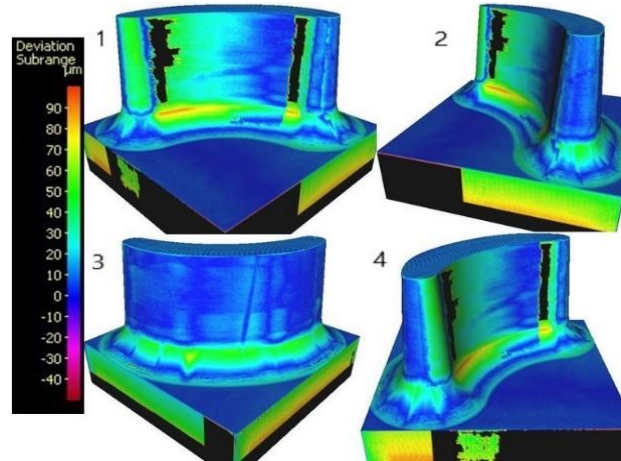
Comparison of the original model with the workpiece after milling (tool path tolerance $50\mu\text{m}$ - Check section)
